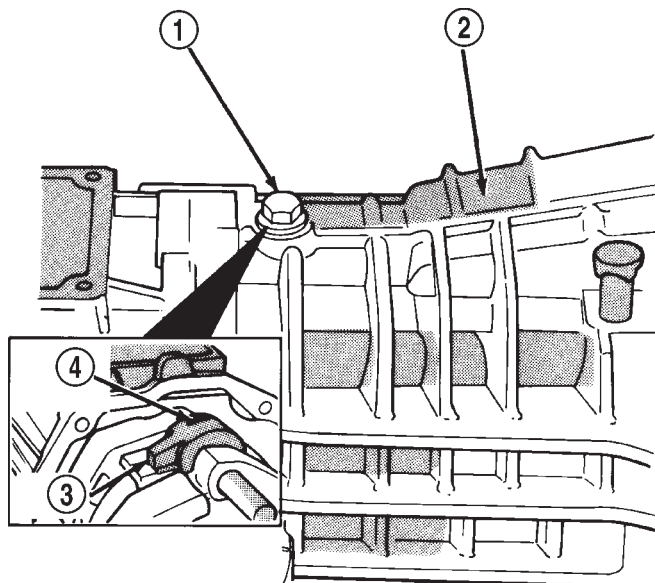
Installing Shift Shaft Bushing Lock Bolt
